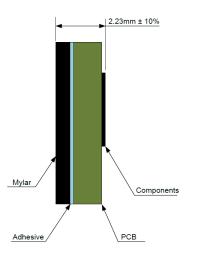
Stack-Up (B) - Thickness: PCB + 3M double sided adhesive + Mylar overlay
